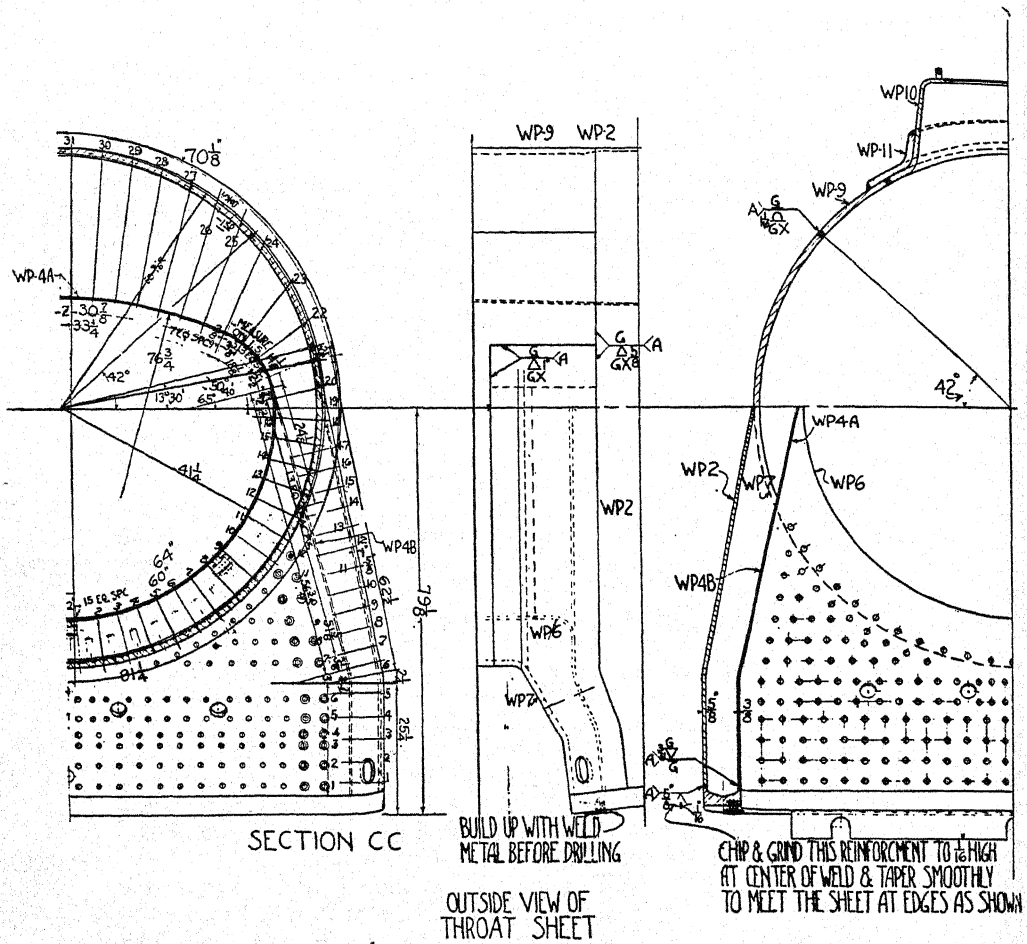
All-welded locomotive boiler—details and cross sections. See also page 223b.
